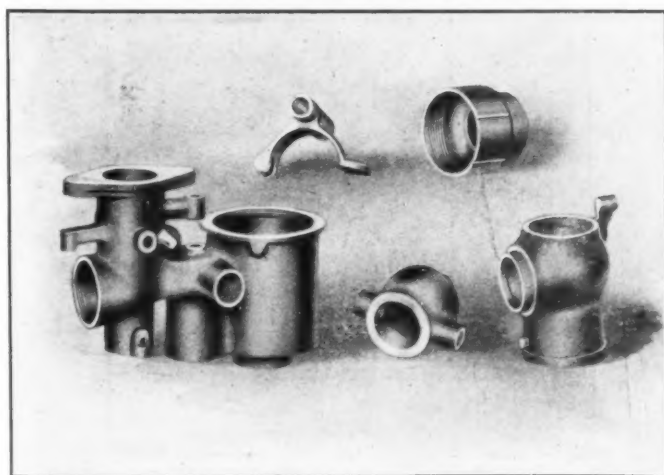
CARBURETOR BRASS PARTS, CHUCKED AND MACHINED IN A TWO JAW AERO CHUCK AND MASTER HINGE COLLET CHUCK.
